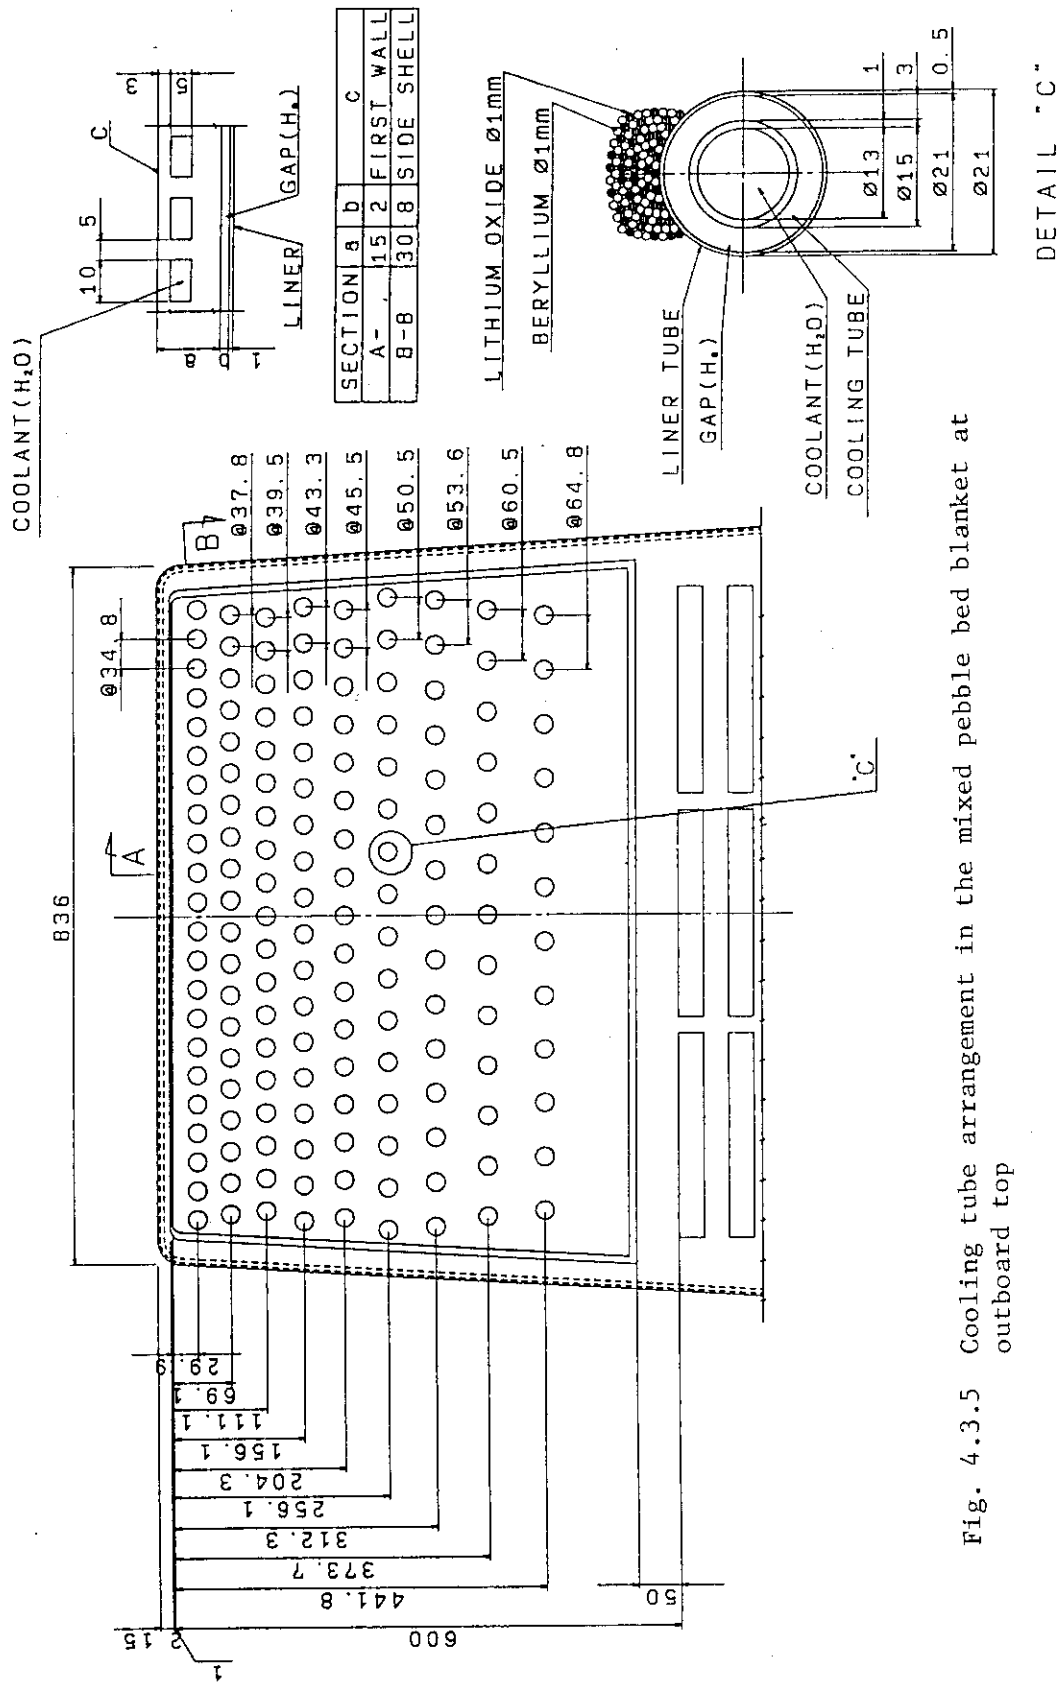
Cooling tube arrangement in the mixed pebble bed blanket at outboard top
